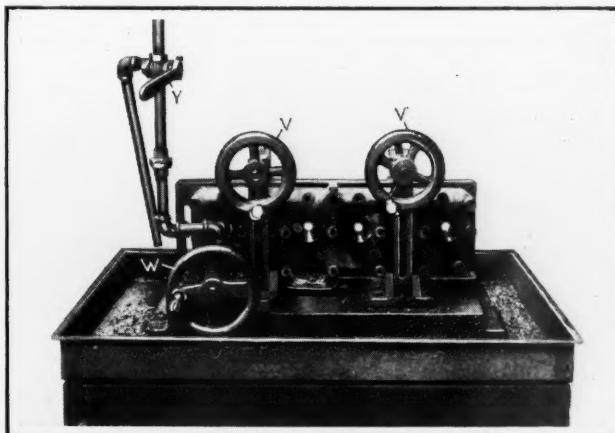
Special Fixture used in testing the Cylinder Heads for Leakage
